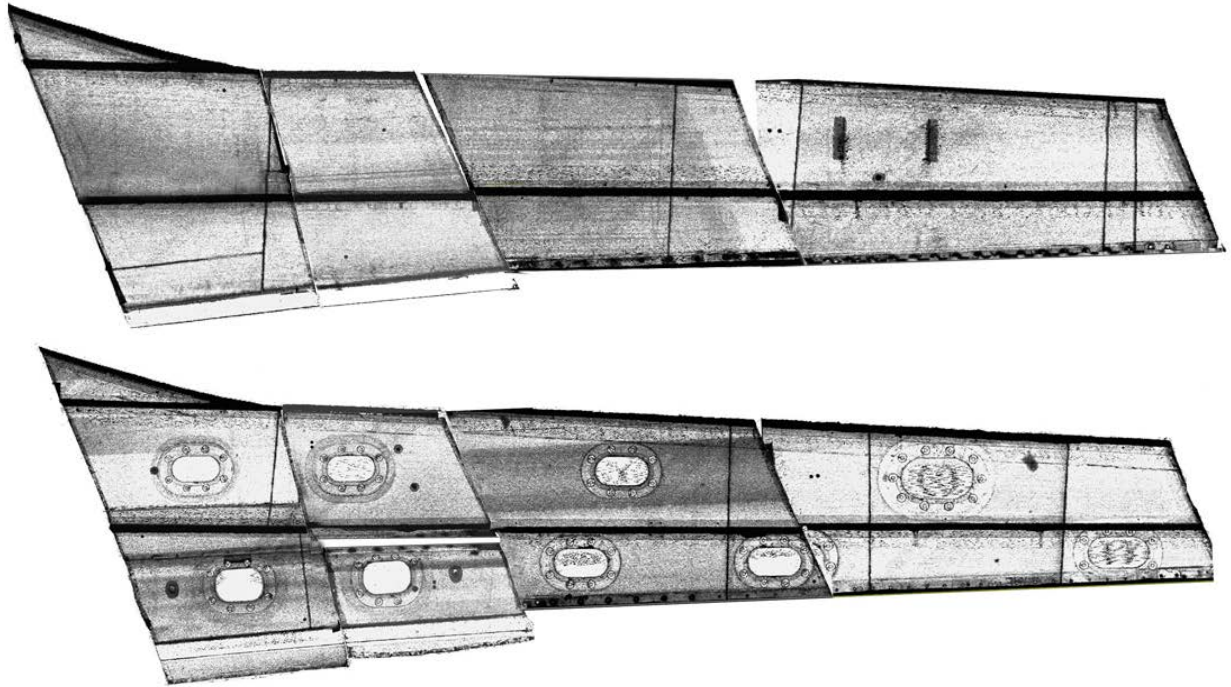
Beechcraft Starship aft wing TTU scans of the left upper- and lower-wing skins
